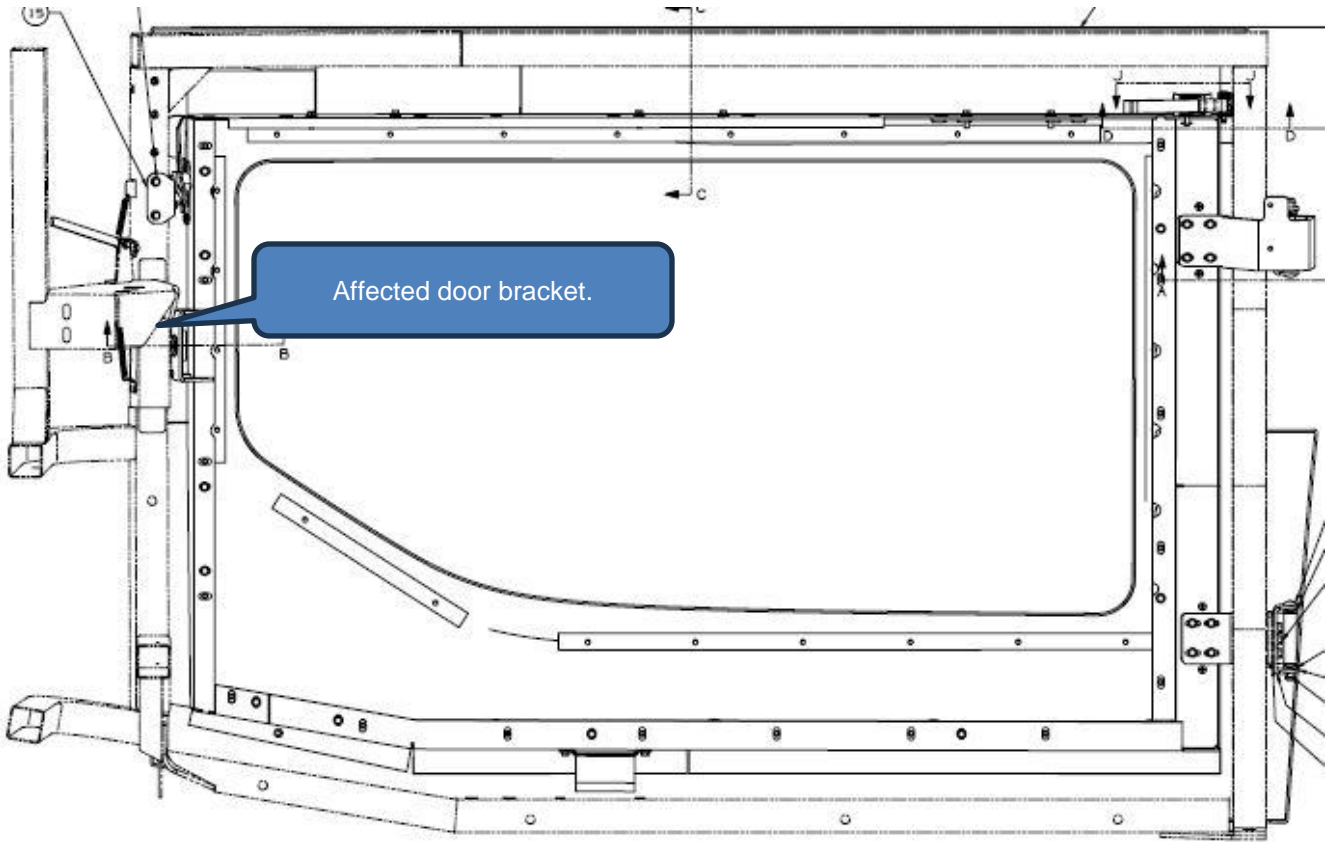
A: SHOWN BACKSIDE VIEW OF THE RADIATOR DOOR (VIEW WITH CRACKS)
